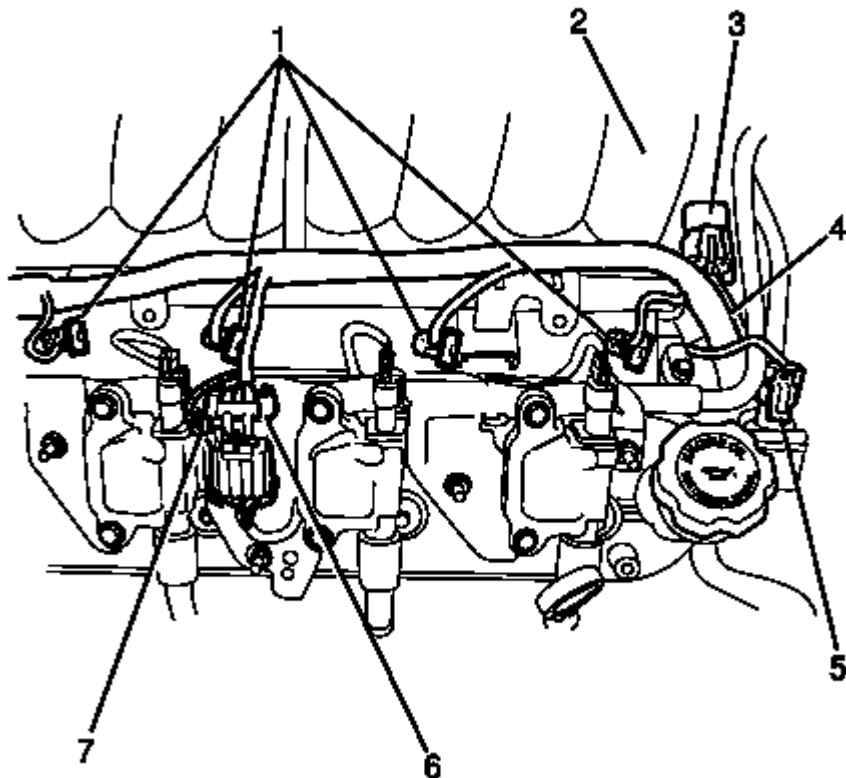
Identifying Right Side Fuel Injector Wiring Harness Connectors
